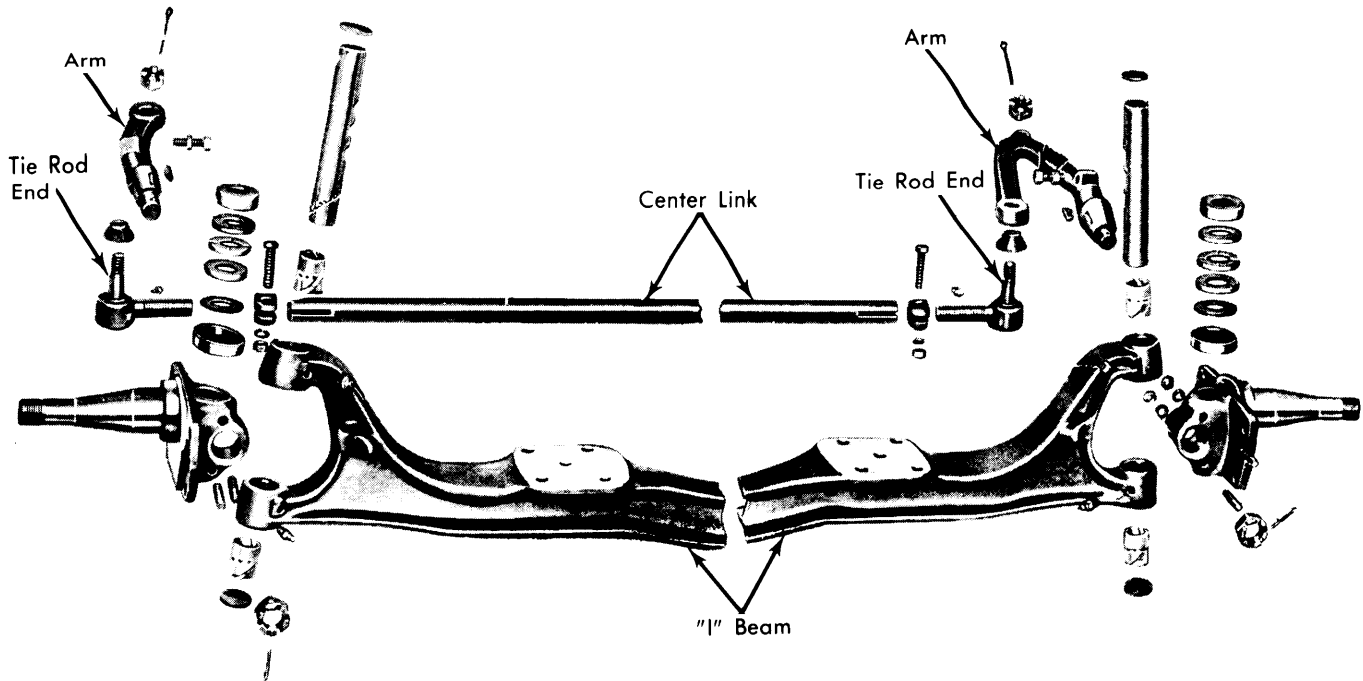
Disassembled View of Motor Home Chassis Steering Linkage (Linkage for Elliot Type Axle Shown)
